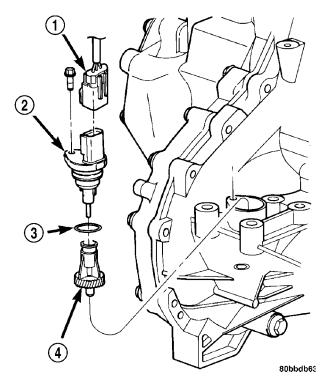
Speed Sensor and Pinion—Removal/ Installation
